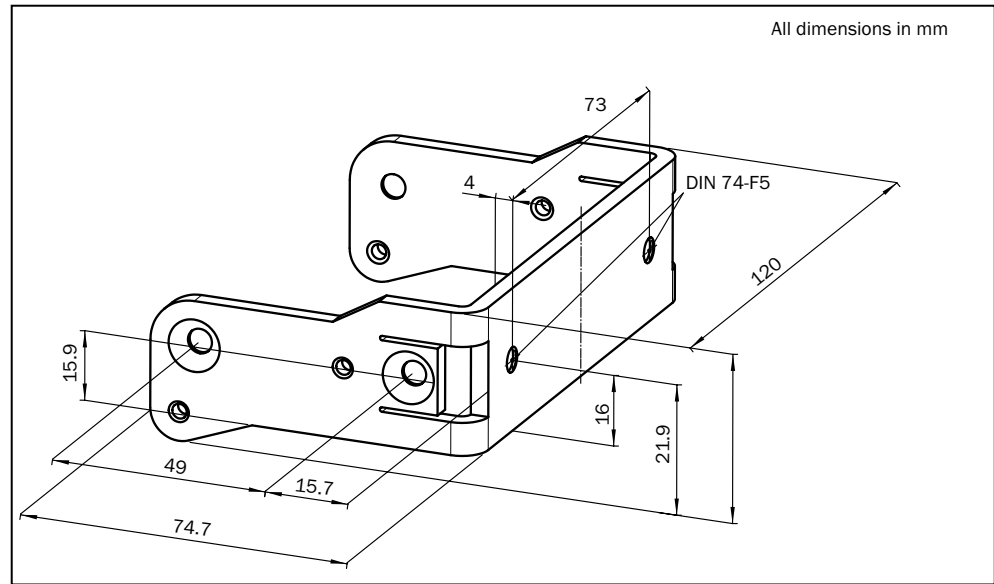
Dimensional drawing mounting kit 1a (part no. 2034324)
